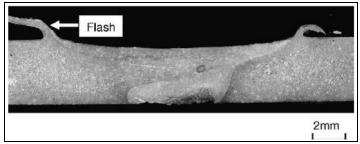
A macrograph image of cross-section weld with appearance of flash defect on the surface obtained by Kim et al. [95] when excess heat used to weld ADC12 aluminum die casting alloy plates.
